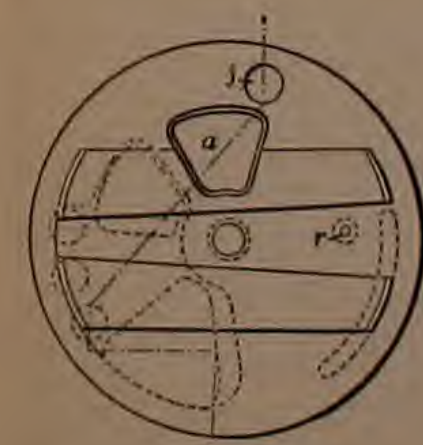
TOP VIEW OF ROTARY VALVE.
